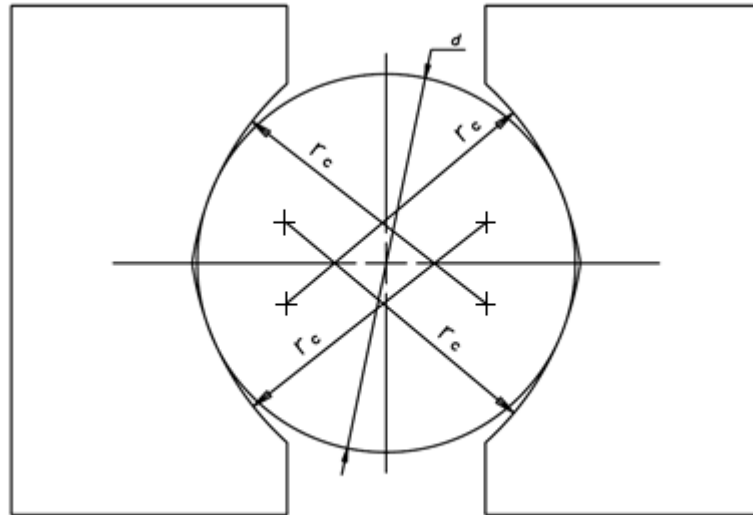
Dimensional parameters of the slewing bearing inner geometry
